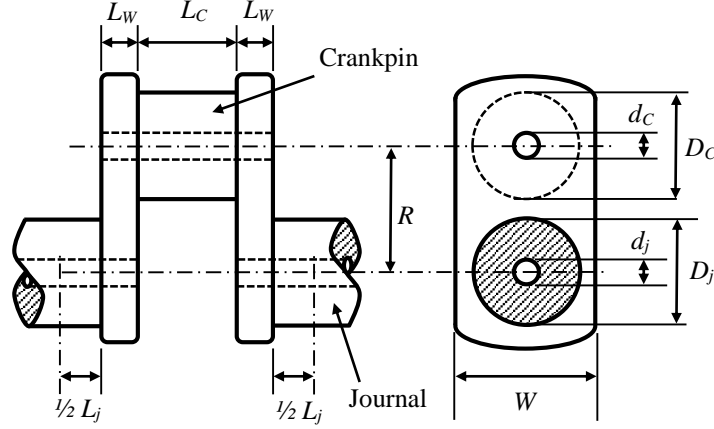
Simplified sketch of reciprocating compressor crankshaft.
